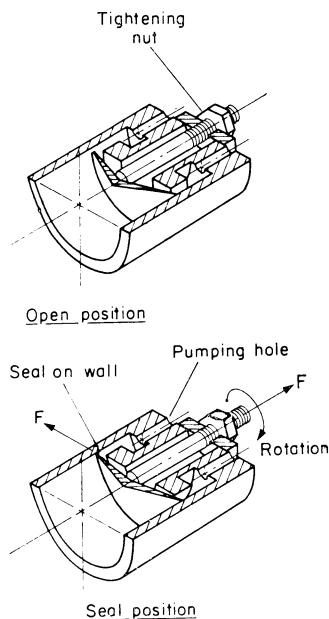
Closing system using an elastic metal washer. Reproduced from Goertz⁴⁵⁵ (Courtesy of Pergamon Press)
